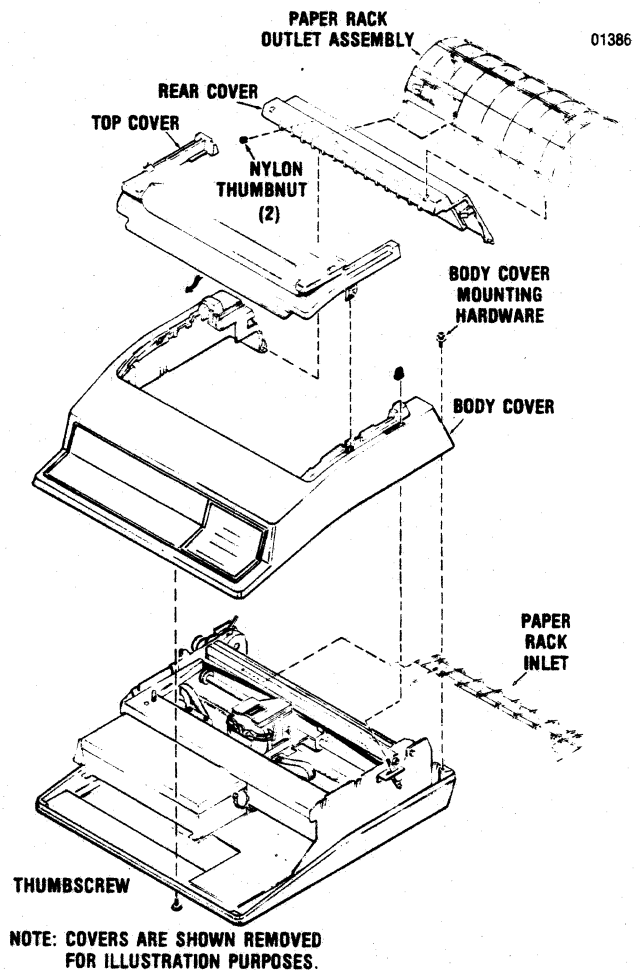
Installation Paper Outlet Rack, Paper Inlet Rack
